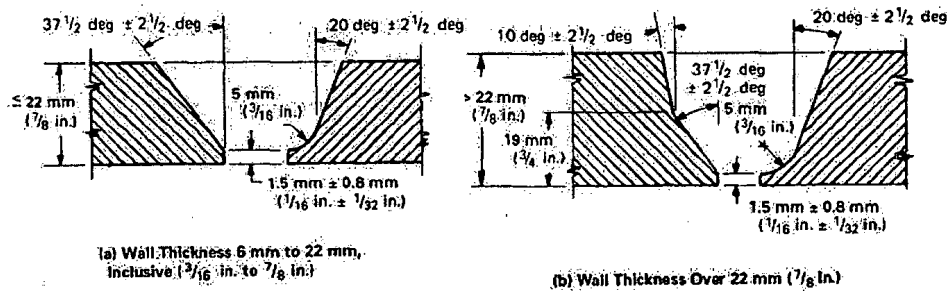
TYPICAL BUTT WELD END PREPARATION
